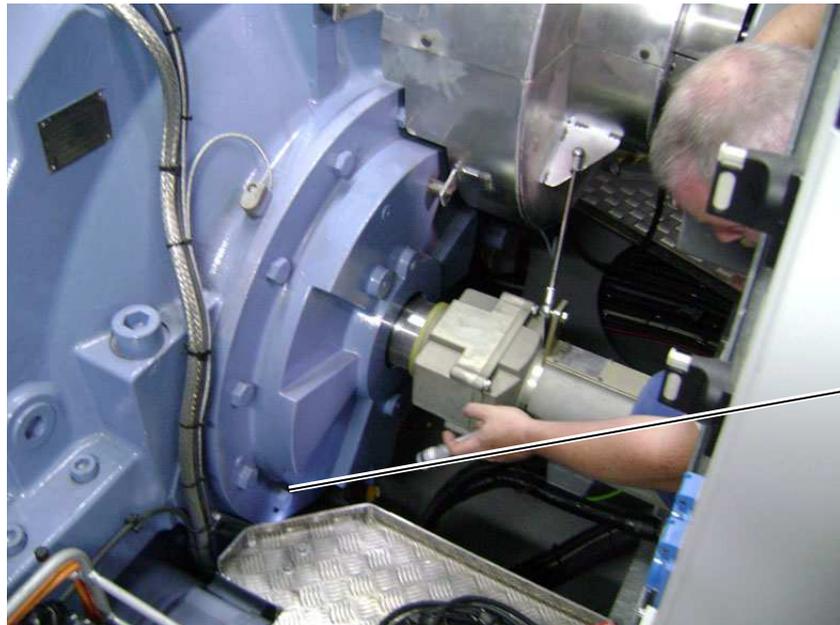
1 Oil level indicator (manufacturer Winergy)
